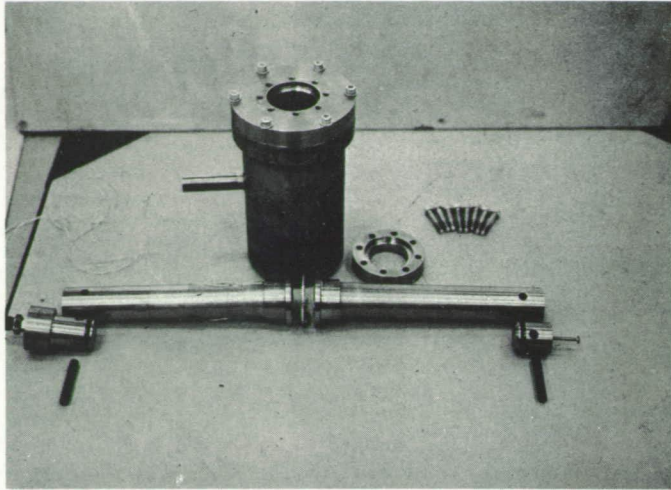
Swaged Gasketed Connector Dis-assembled and Test Devices
